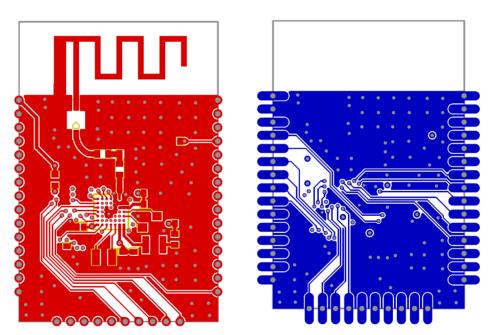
QN9083 WLCSP module board PCB layout top and bottom layers
